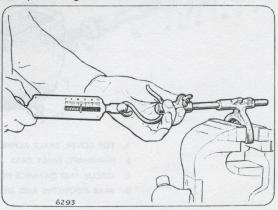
Checking of axial load of 3rd and 4th selector shaft and fork.
